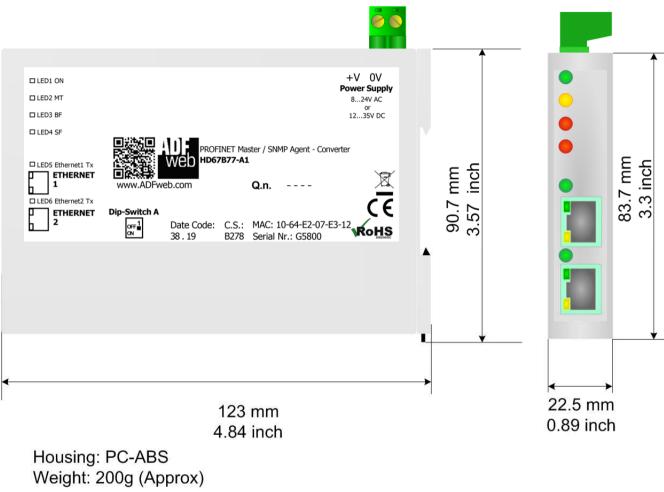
Mechanical dimensions scheme for HD67B77-A1
